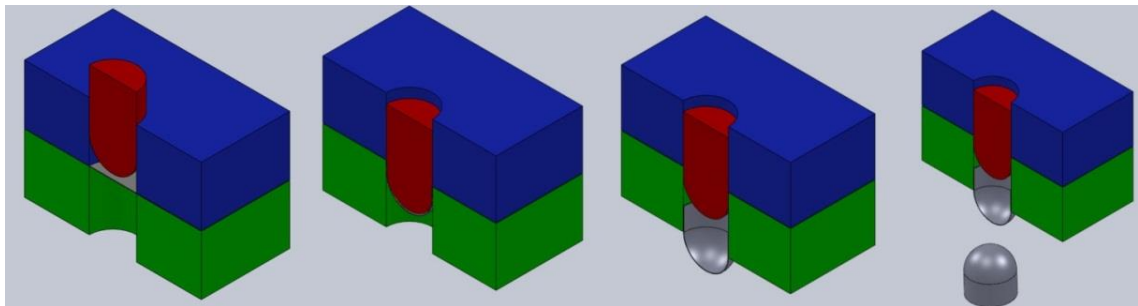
Schematic representation of deep drawing method (green part: forming die, blue part: blank holder, red part: mechanical punch, grey part: workpiece).
